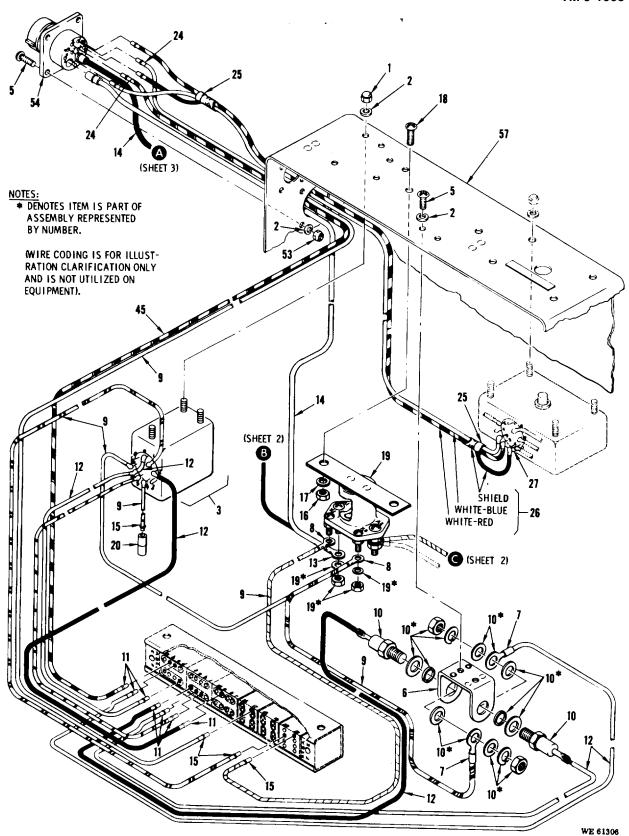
(1). Control box subassembly—partial exploded view (sheet 1 of 3).
